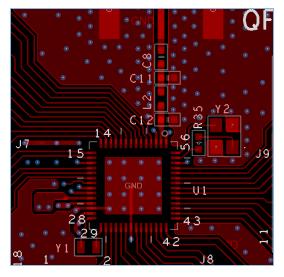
Top layer design for 4-layer PCB (QFN56)
